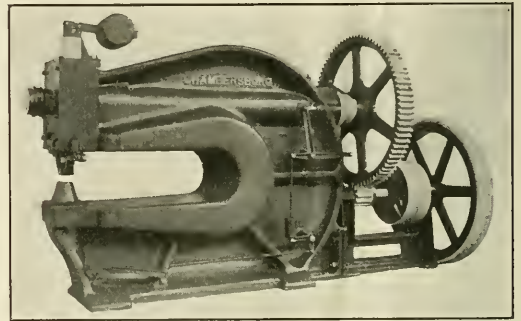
Single End Punching Machine with Mechanical Control and Belt Drive
